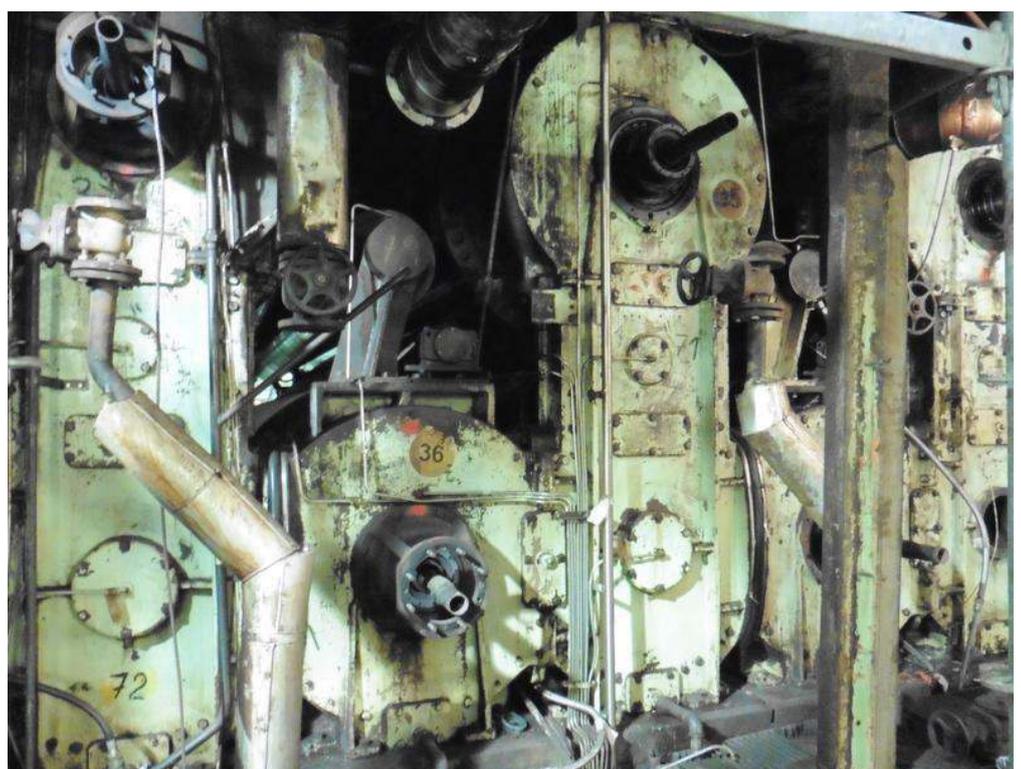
Closed gearbox as drive of the dryer groups of the PM5, already without steam heads.
